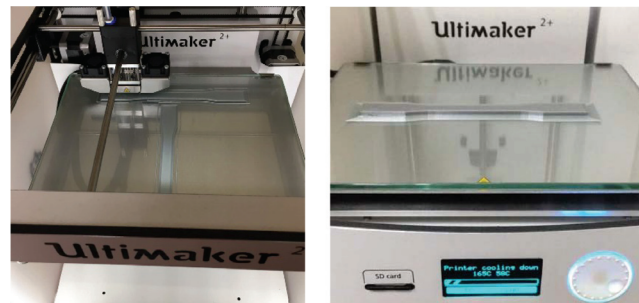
Parts fabrication using the FDM printer Ultimaker<sup>2+</sup>
